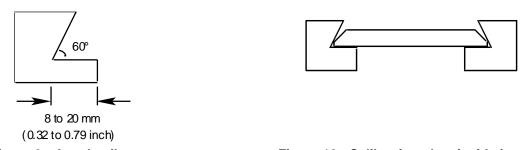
Jaw details Figure 10 - Calibration plate inside jaws
